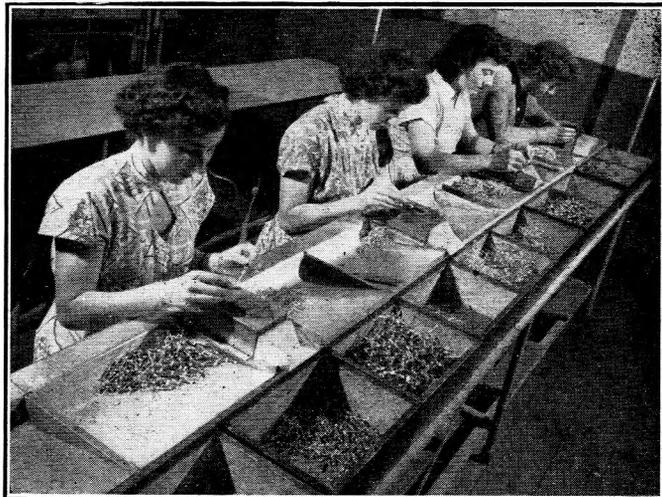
SOLDERING WIRES TO BRIMISTORS.
